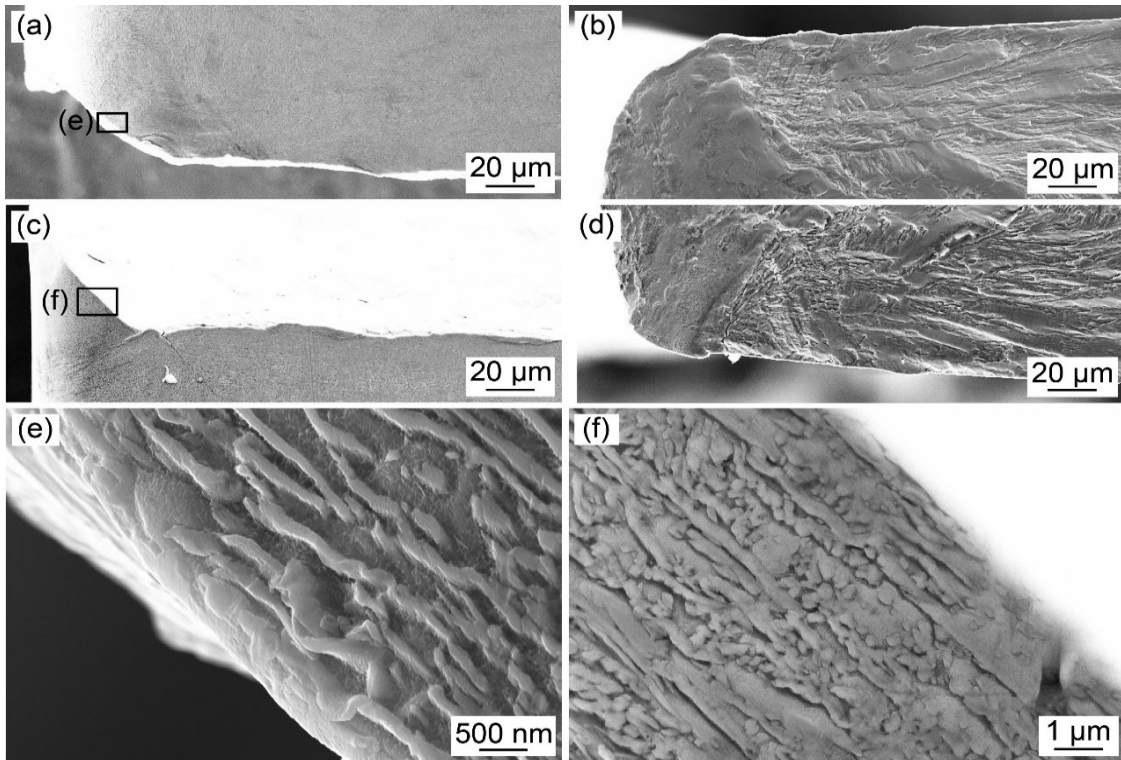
The crack initiation location of specimen aged at 600 °C for 3 h. The side views (a) and (c) and the fractographies (b) and (d) of the crack initiation location. (e) and (f) The high magnification images of the places marked in (a) and (c).
